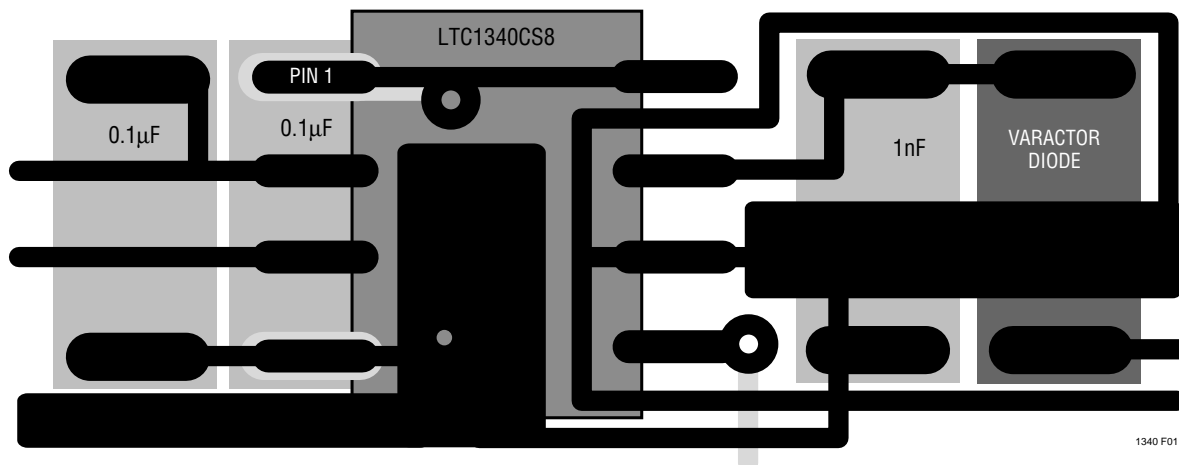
Suggested Surface Mount PCB Layout for LTC1340CS8
